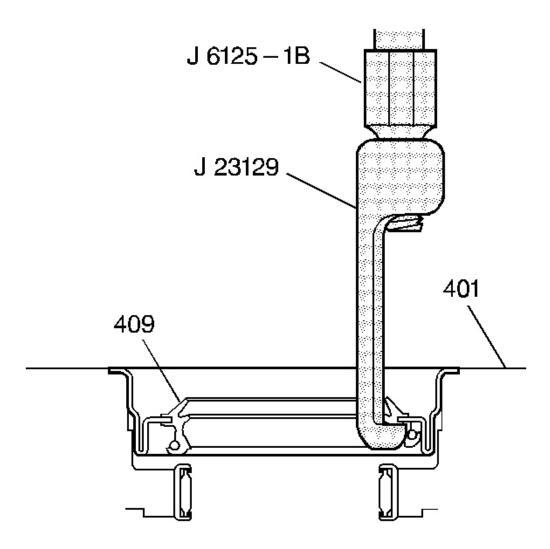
Removing Left Front Wheel Drive Shaft Oil Seal Courtesy of GENERAL MOTORS CORP.
